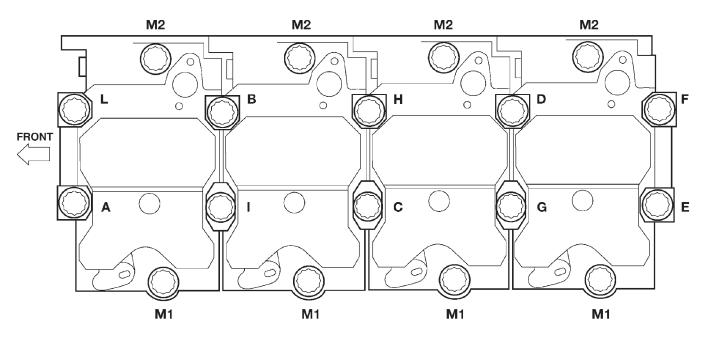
Engine Cylinder Head Bolt Tightening Sequence
